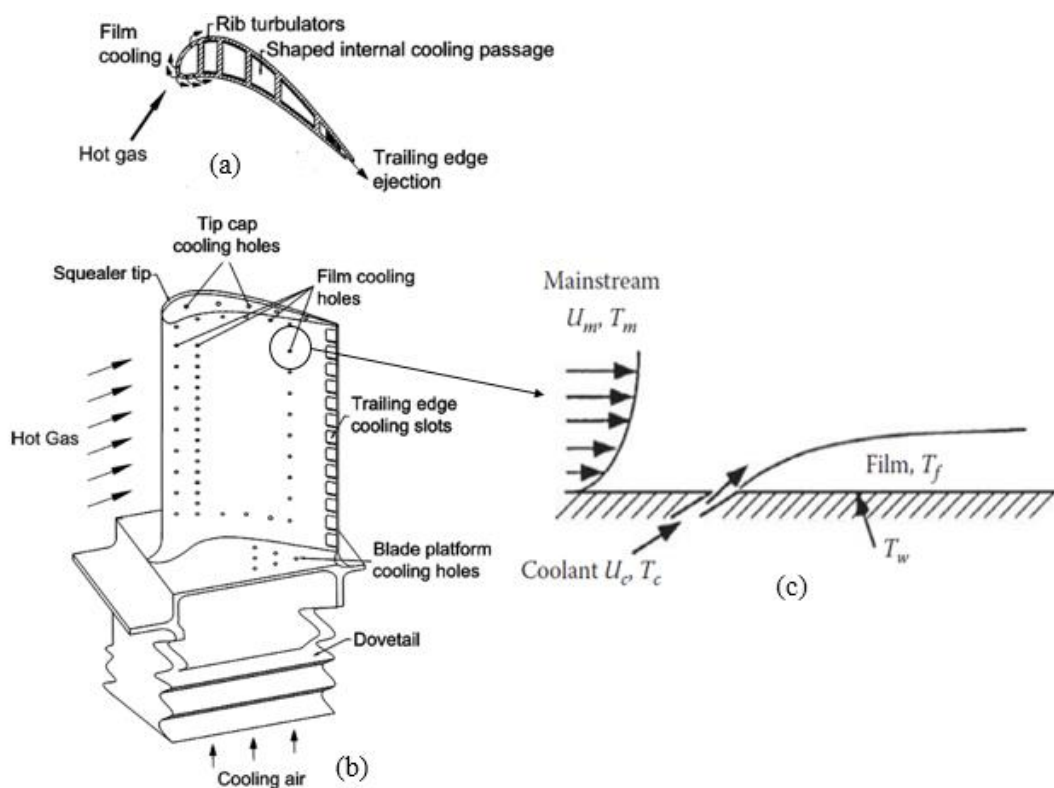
Film cooling arrangement over a turbine blade (a) Cross-sectional view (b) Three-dimensional view (c) Film cooling mechanism exaggerated over a single hole (Han et al. 2012).
